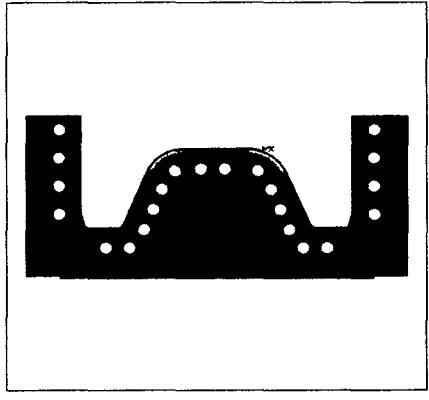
Temperature distribution for continuous casting welding-coated mold at 52.5 sec.
